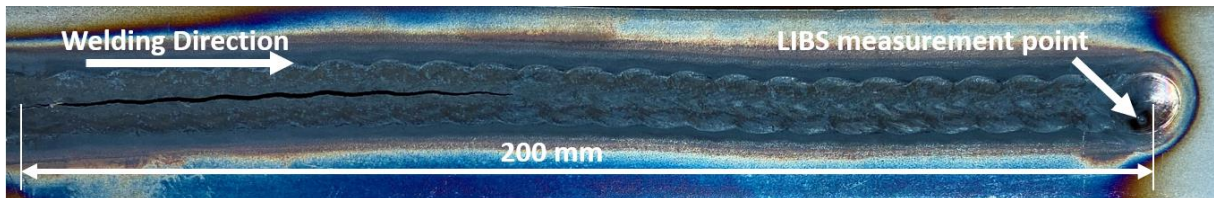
Finished weld seam of the Sample 7, LIBS measurement spot on the weld end crater is marked.
